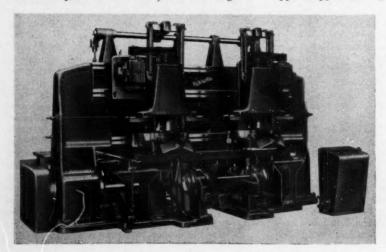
Out-feed End of the Robinson Adzing and Boring Machine, Showing the Boring Heads and the Control Panel on the Right
